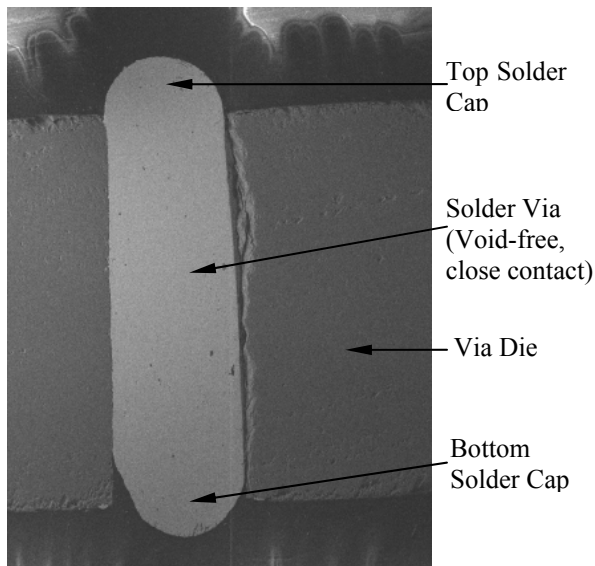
Cross-sectional view of a low-resistance ‘vertical solder-pump’ solder interconnect (via die thickness of around 500 microns). Please note the void-free fill of the via through-hole and the hemispherical solder caps formed on each side of the via die during reflow.
